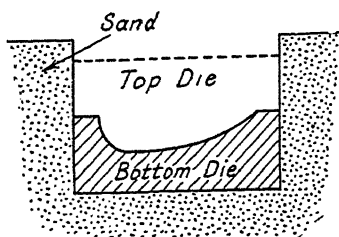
METHOD OF CASTING A LEAD TOP DIE, USING THE ZINC BOTTOM DIE AS A PATTERN
